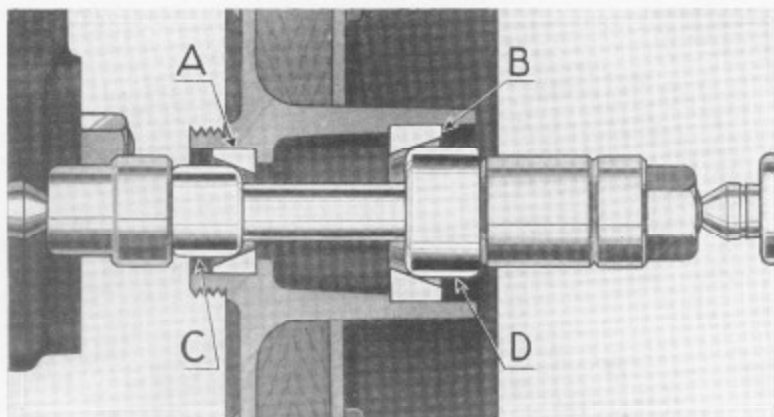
Self-Centering Mandrel and Universal Bearing Adapters in Timken Bearing Cups
